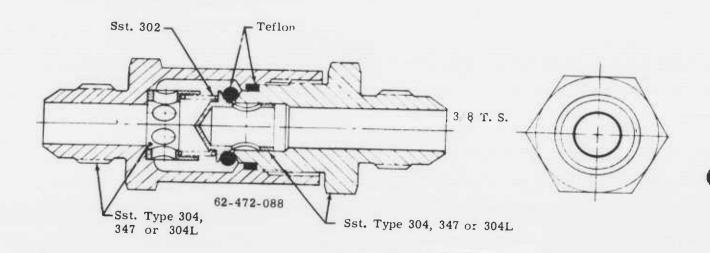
Cross Section - Valve Assembly - Manual Fill, Start Tank 62-472-340
